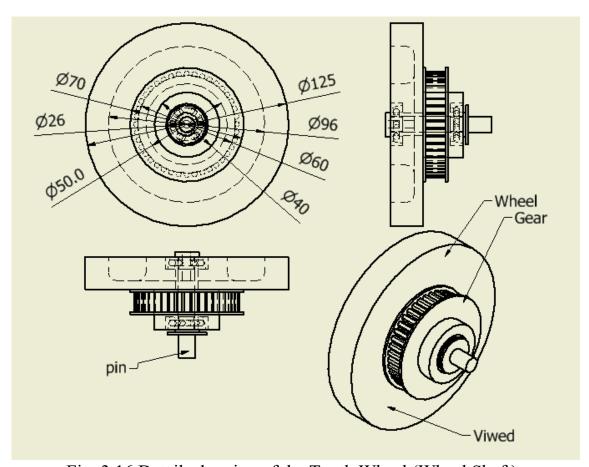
Details drawing of the Tooth Wheel (Wheel Shaft)
